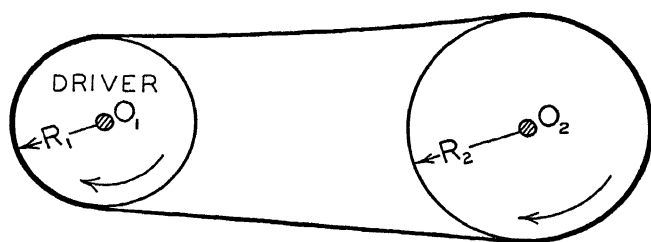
Open Belt Connecting Parallel Shafts.
